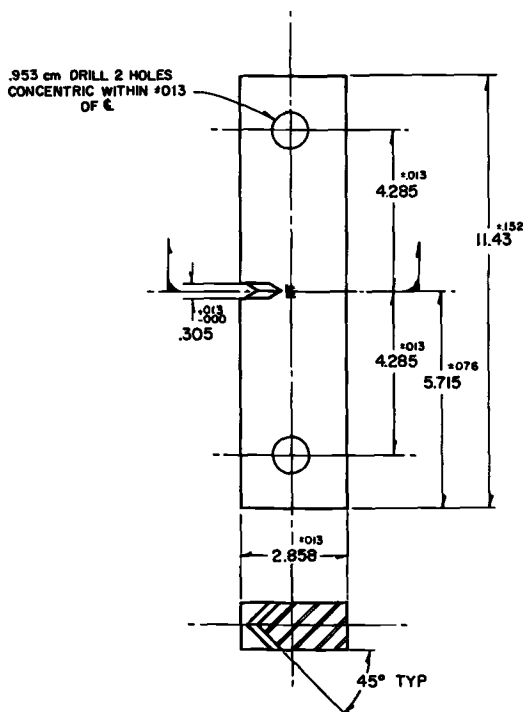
Illustration of fracture toughness specimen used. All dimensions in centimeters.
